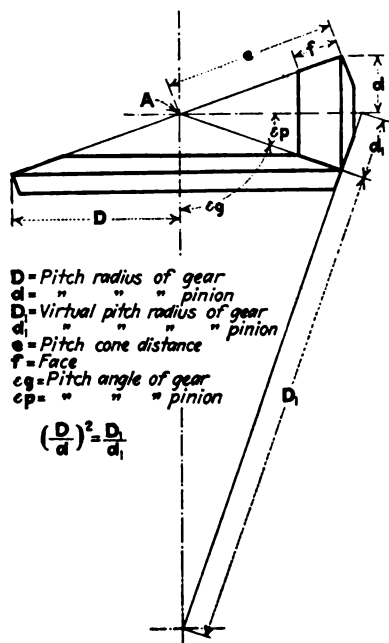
PITCH SURFACES OF BEVEL GEARS
